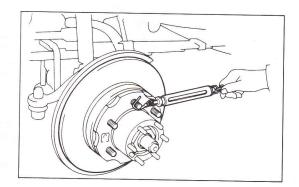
Spring scale being used to determine starting preload of front wheel bearings.
